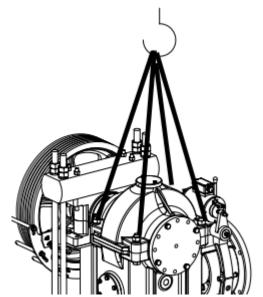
TGD1B Gear Box Recommended Hoisting Method without motor
